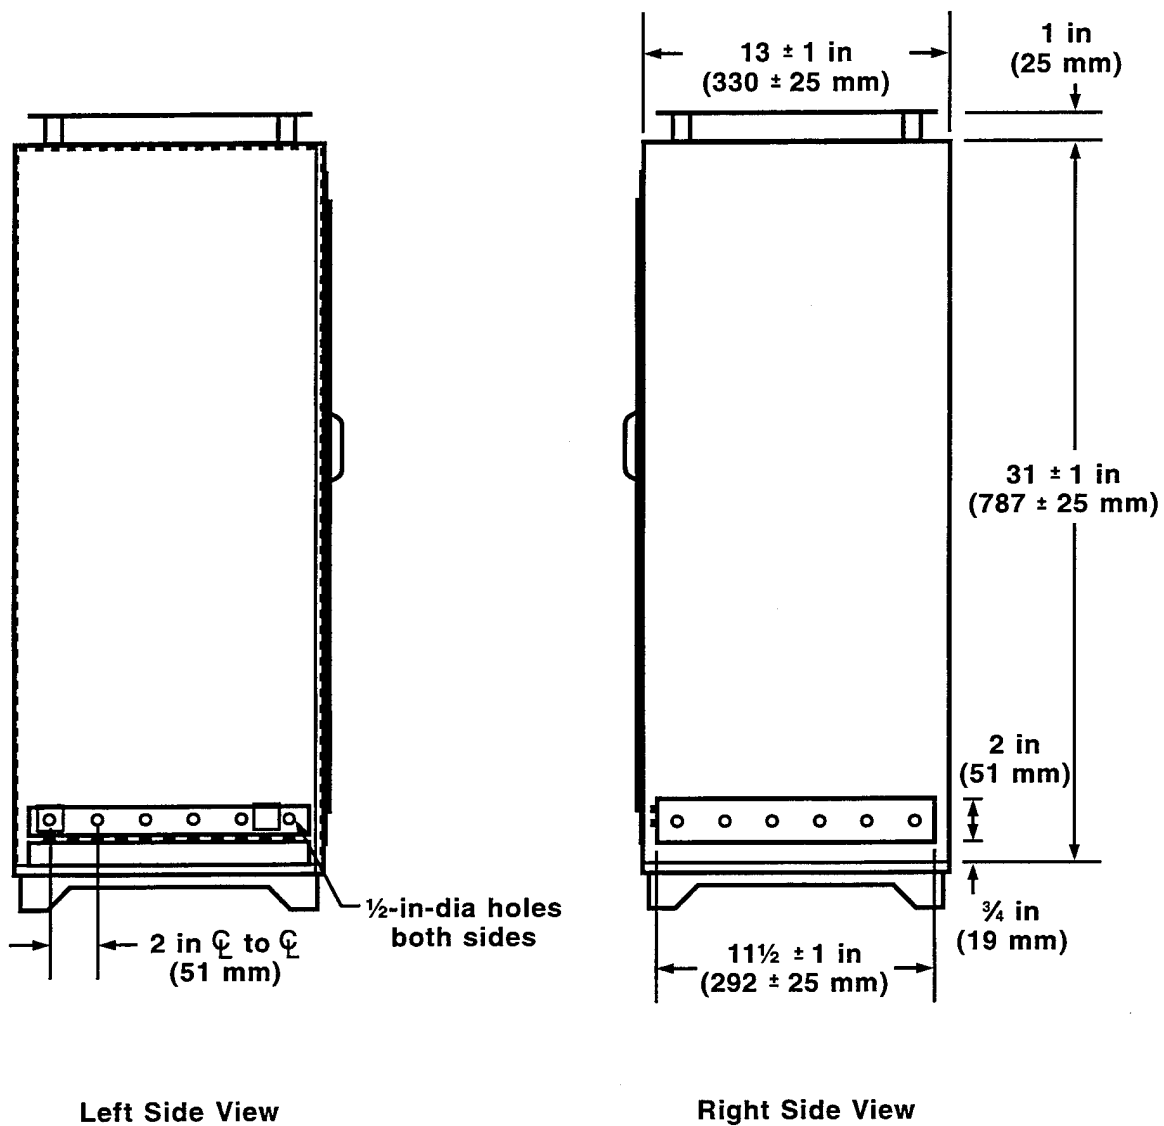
SIDE VIEWS OF BUNSEN BURNER TEST CABINET
